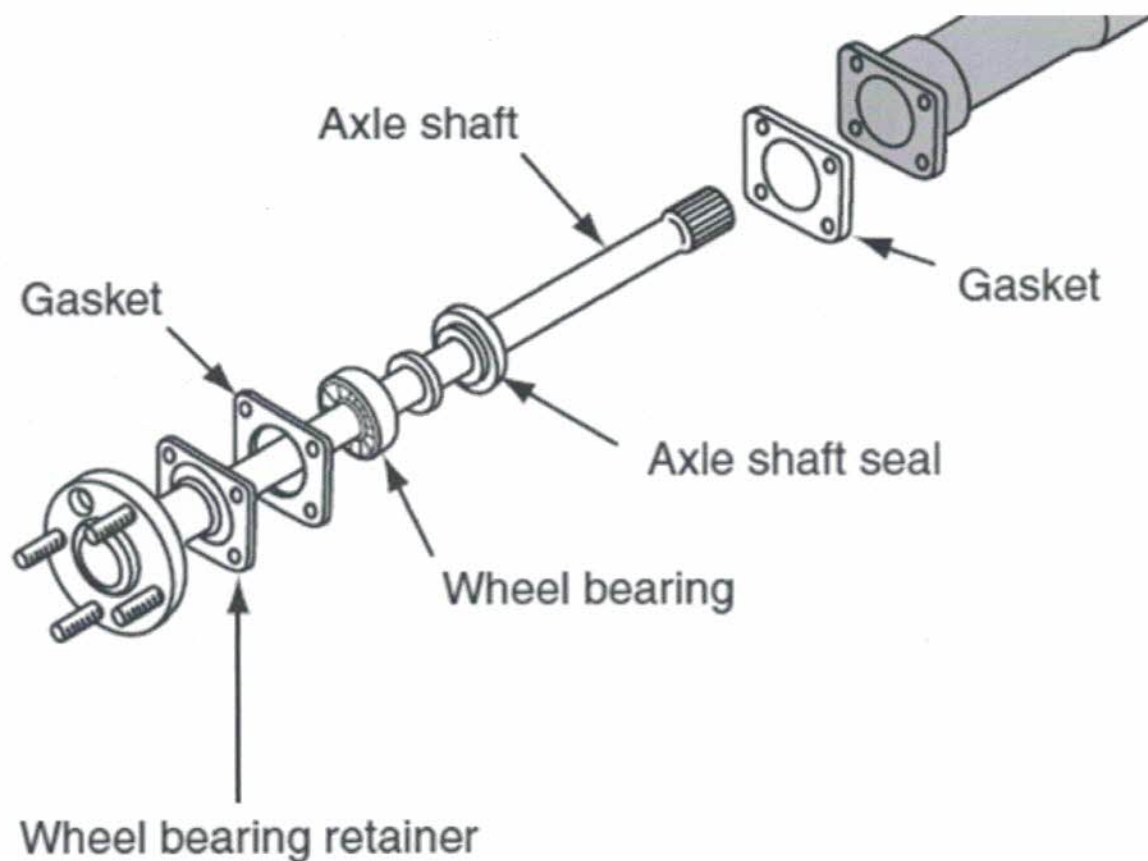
provides a typical view of a rear axle from the period of 1940's to 60's and shows the axle shaft seal isolating the wheel bearing from the differential oil.
